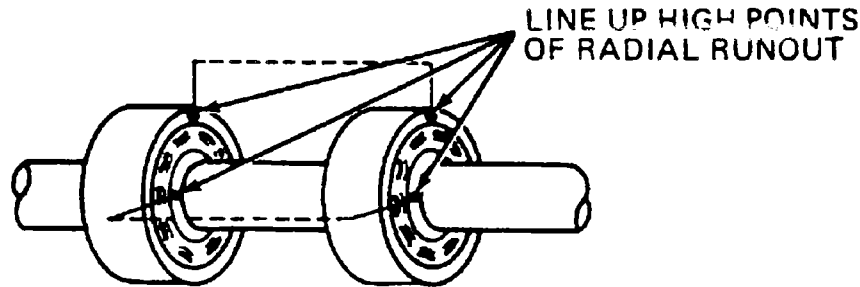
Bearing Ring Radial Runout Alignment of Precision Bearing Pairs
